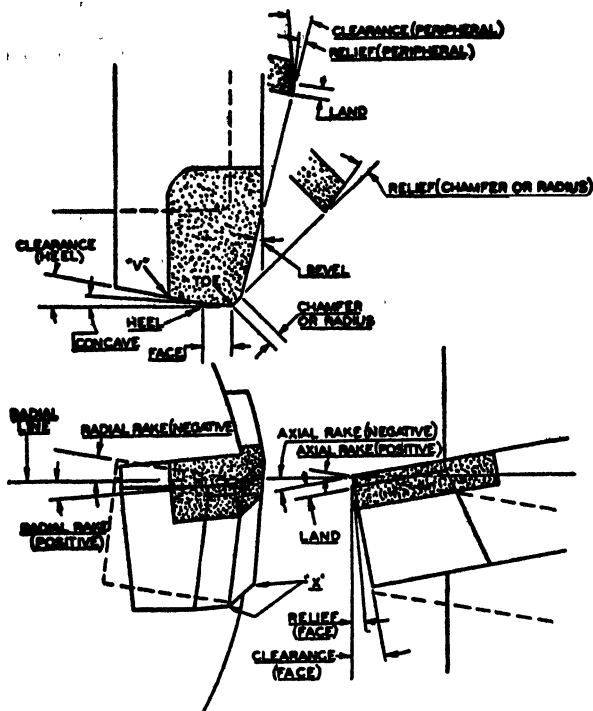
Nomenclature for Milling Cutter with Cemented-Carbide Tips
